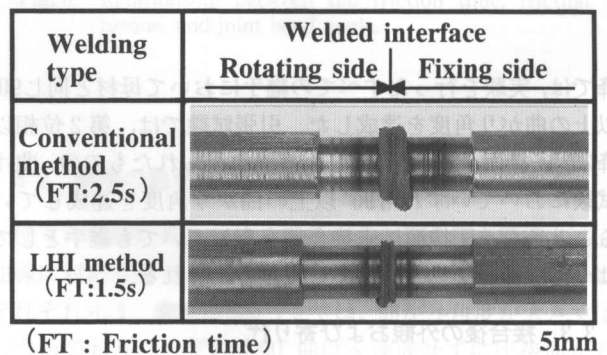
Appearances of welded joints after welding by the conventional method and LHI method.
